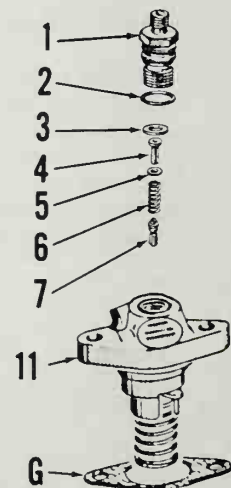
Partial exploded view of fuel injection pump. Injection timing is adjusted using shim gaskets (G).
